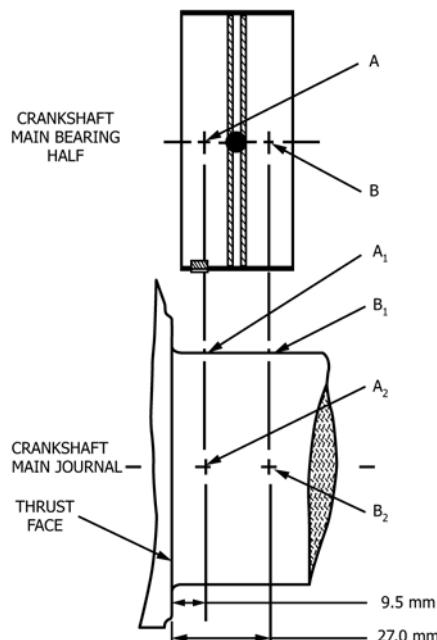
Clearance Measuring Points for Crankshaft Main Bearings
